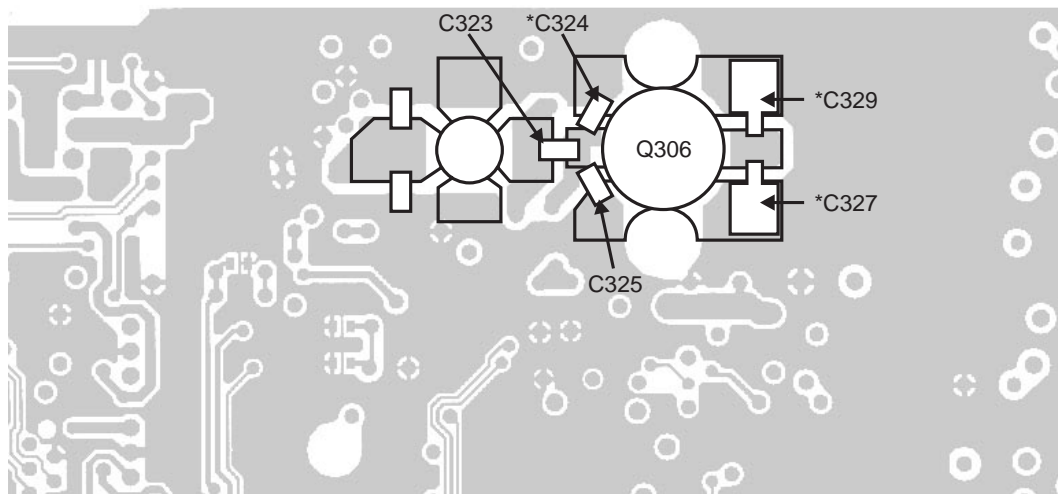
T2000-500/600 PA - Bottom Side
